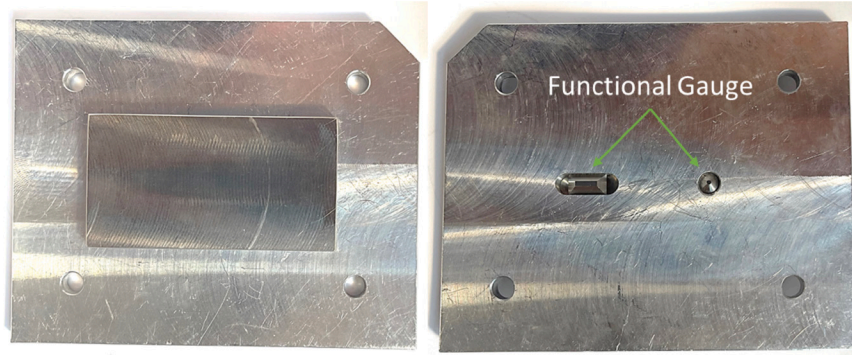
Position of hole and slot inspection method using functional gauge from the front view (left) and back view (right).
